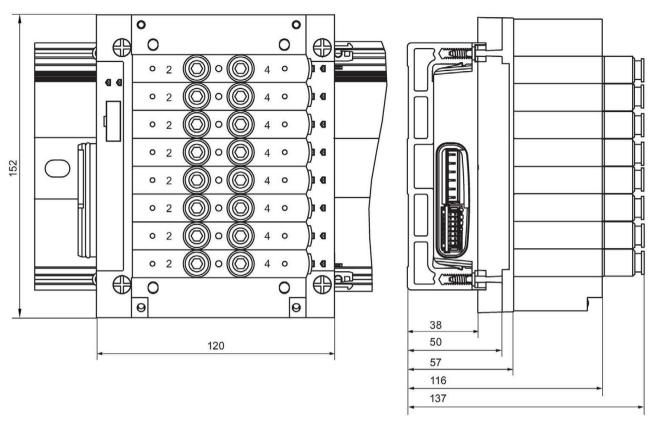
Dimension drawing of 16 DO DC 24V CPV14 pneumatic interface module with FESTO valve terminal CPV14 on compact type rack
